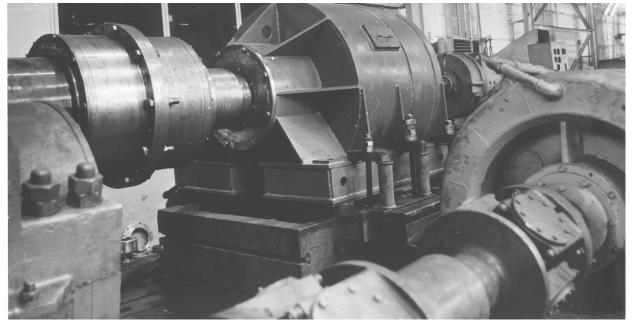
Ore-pulverizing mill harmonic gear drive stand tests
